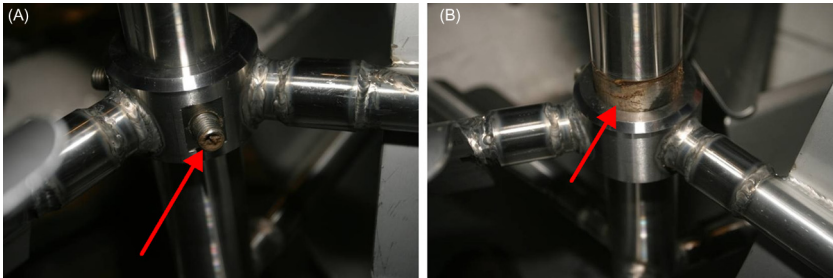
(A) The hub is secured to the shaft by means of bolts with dome head nuts. However, product may collect in and around the screw head (*red arrow*). (B) This nonwelded hub-to-shaft joint also lacks a food grade gasket that could seal the dead spaces in the groove and avoid crevices at points of metal-to-metal contact. Ingress and accumulation of product and/or microorganisms at the inside (*red arrow*) are shown. Welds also have a high degree of roughness. *Courtesy of Burggraaf & Partners B.V.
